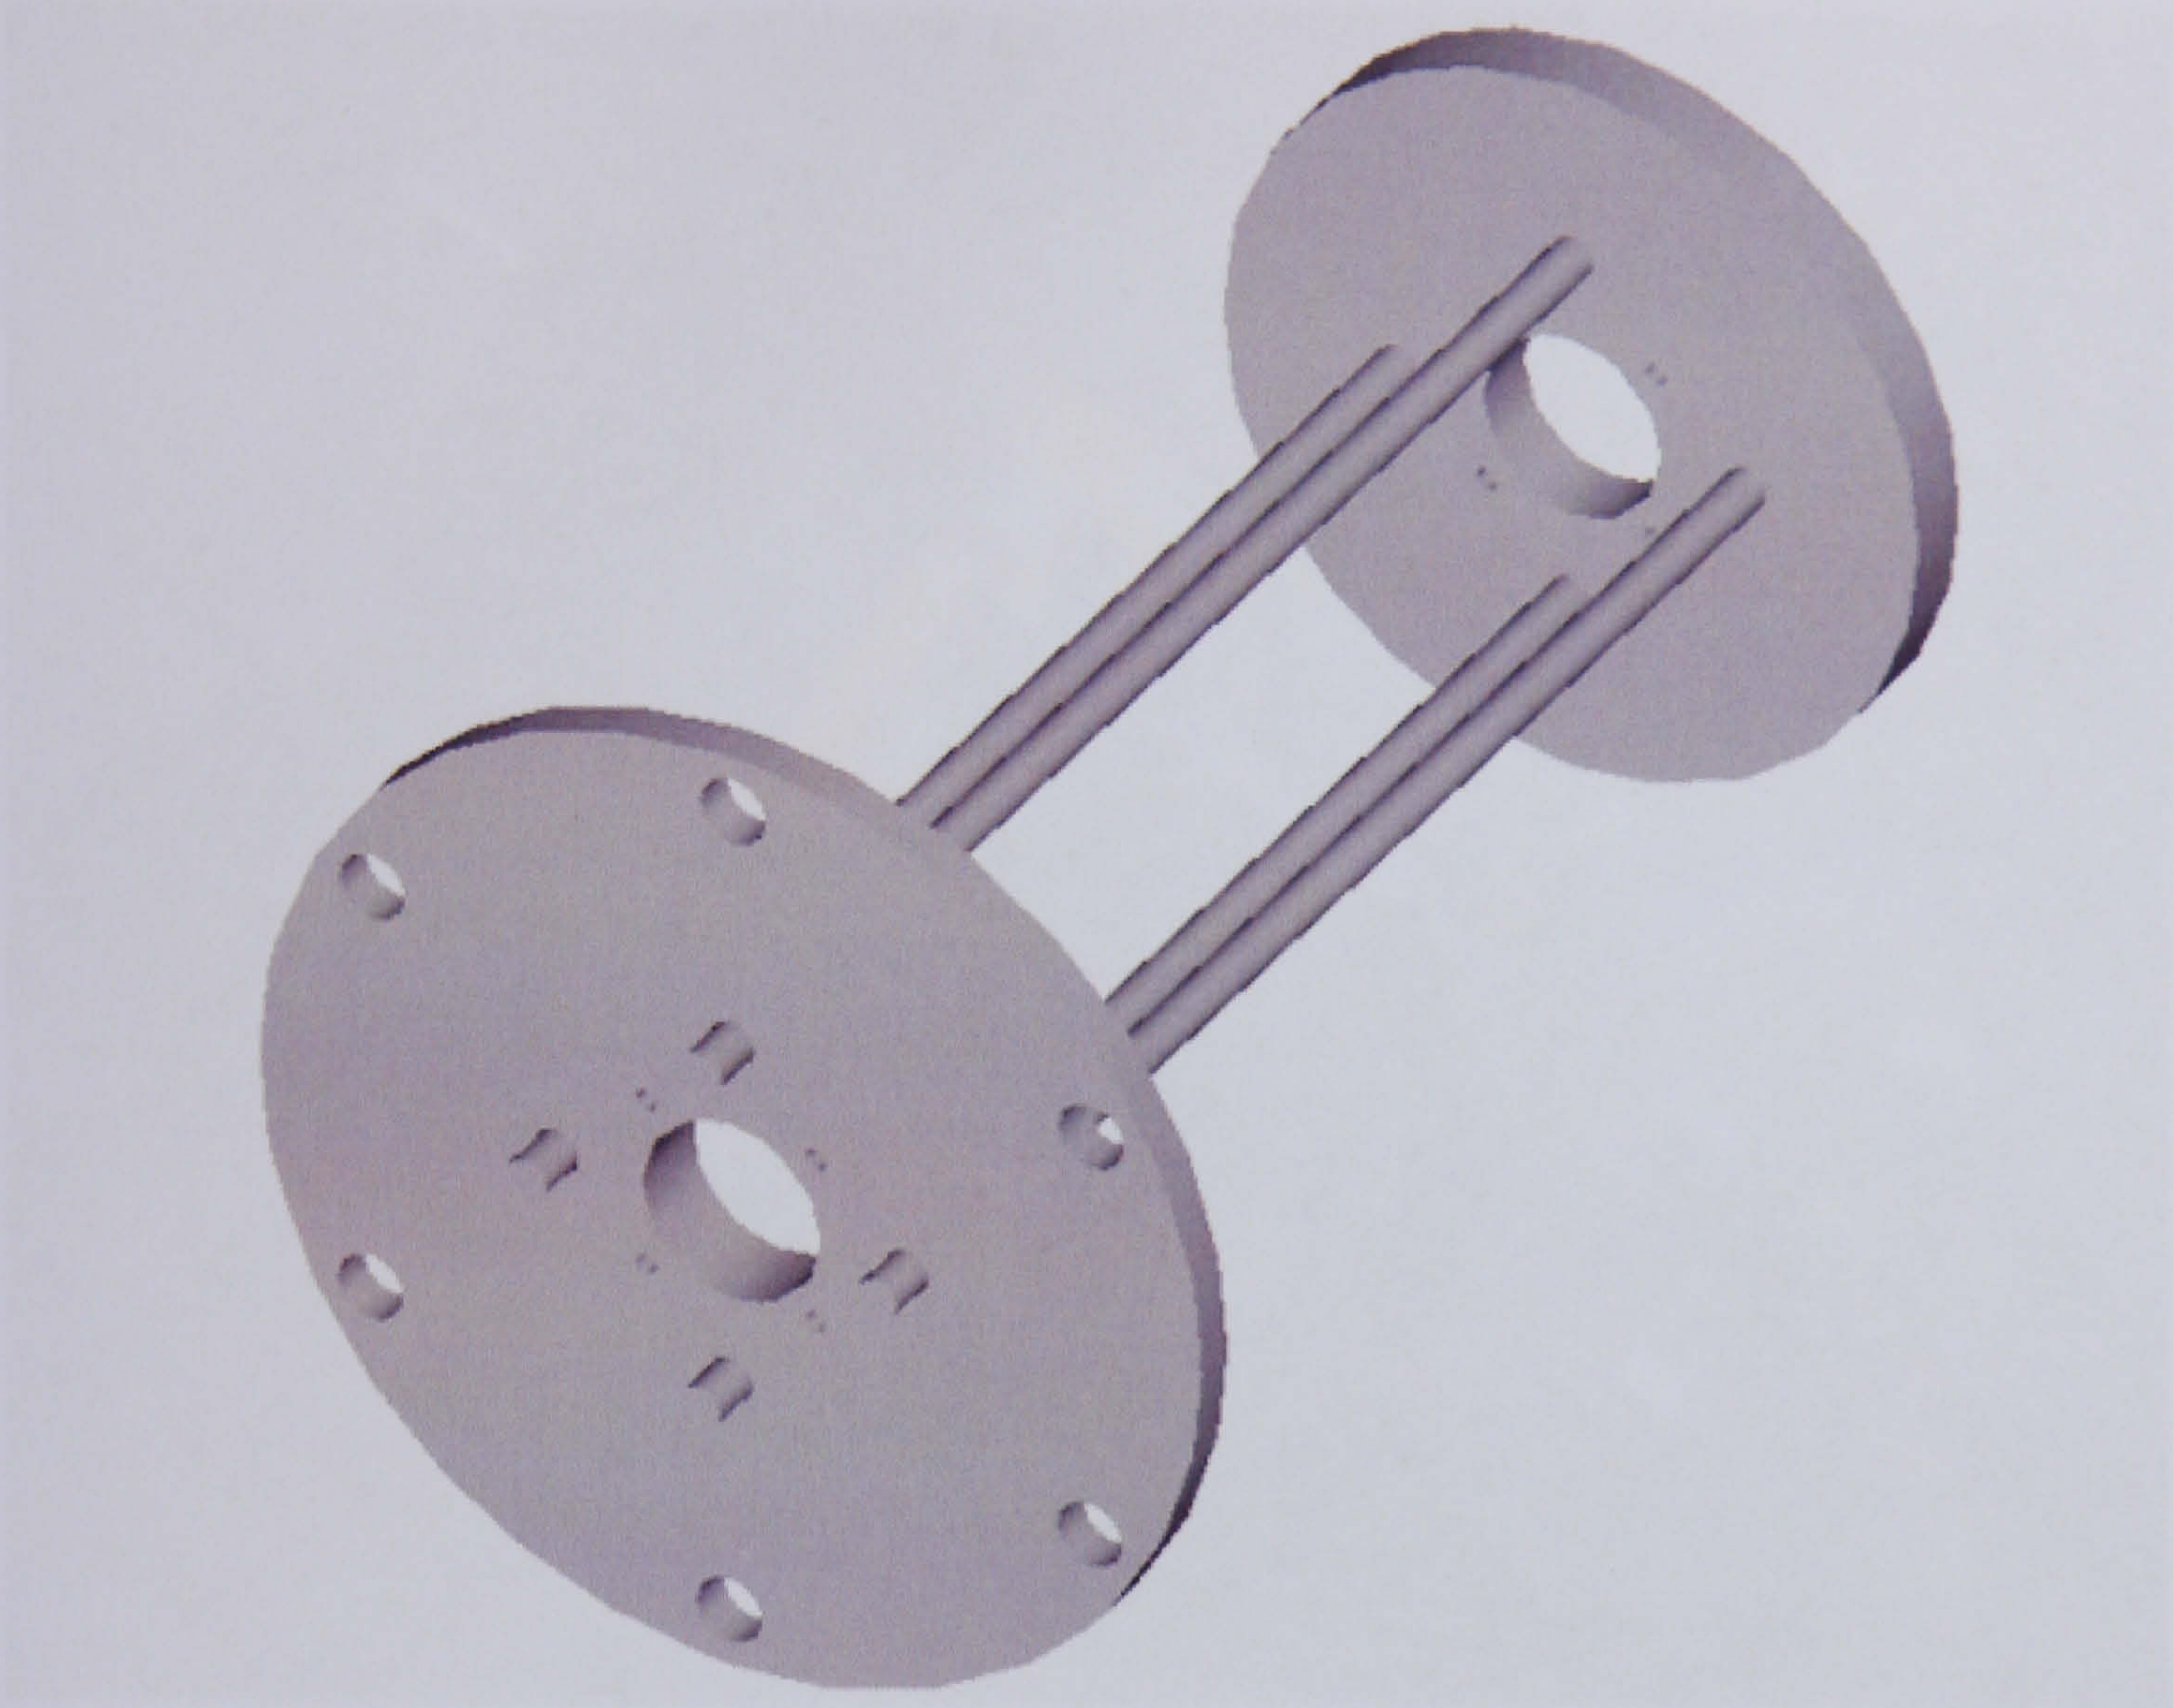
PCB Mounting Cage Assembly: Isometric View
